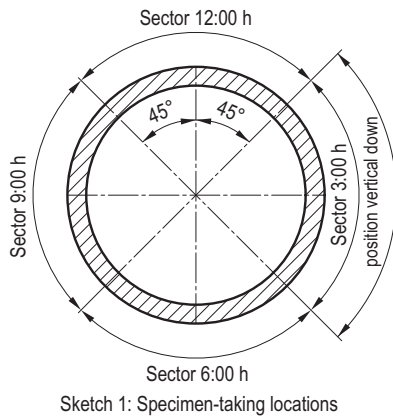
Testing areas for seam welds between ferritic and austenitic steels
